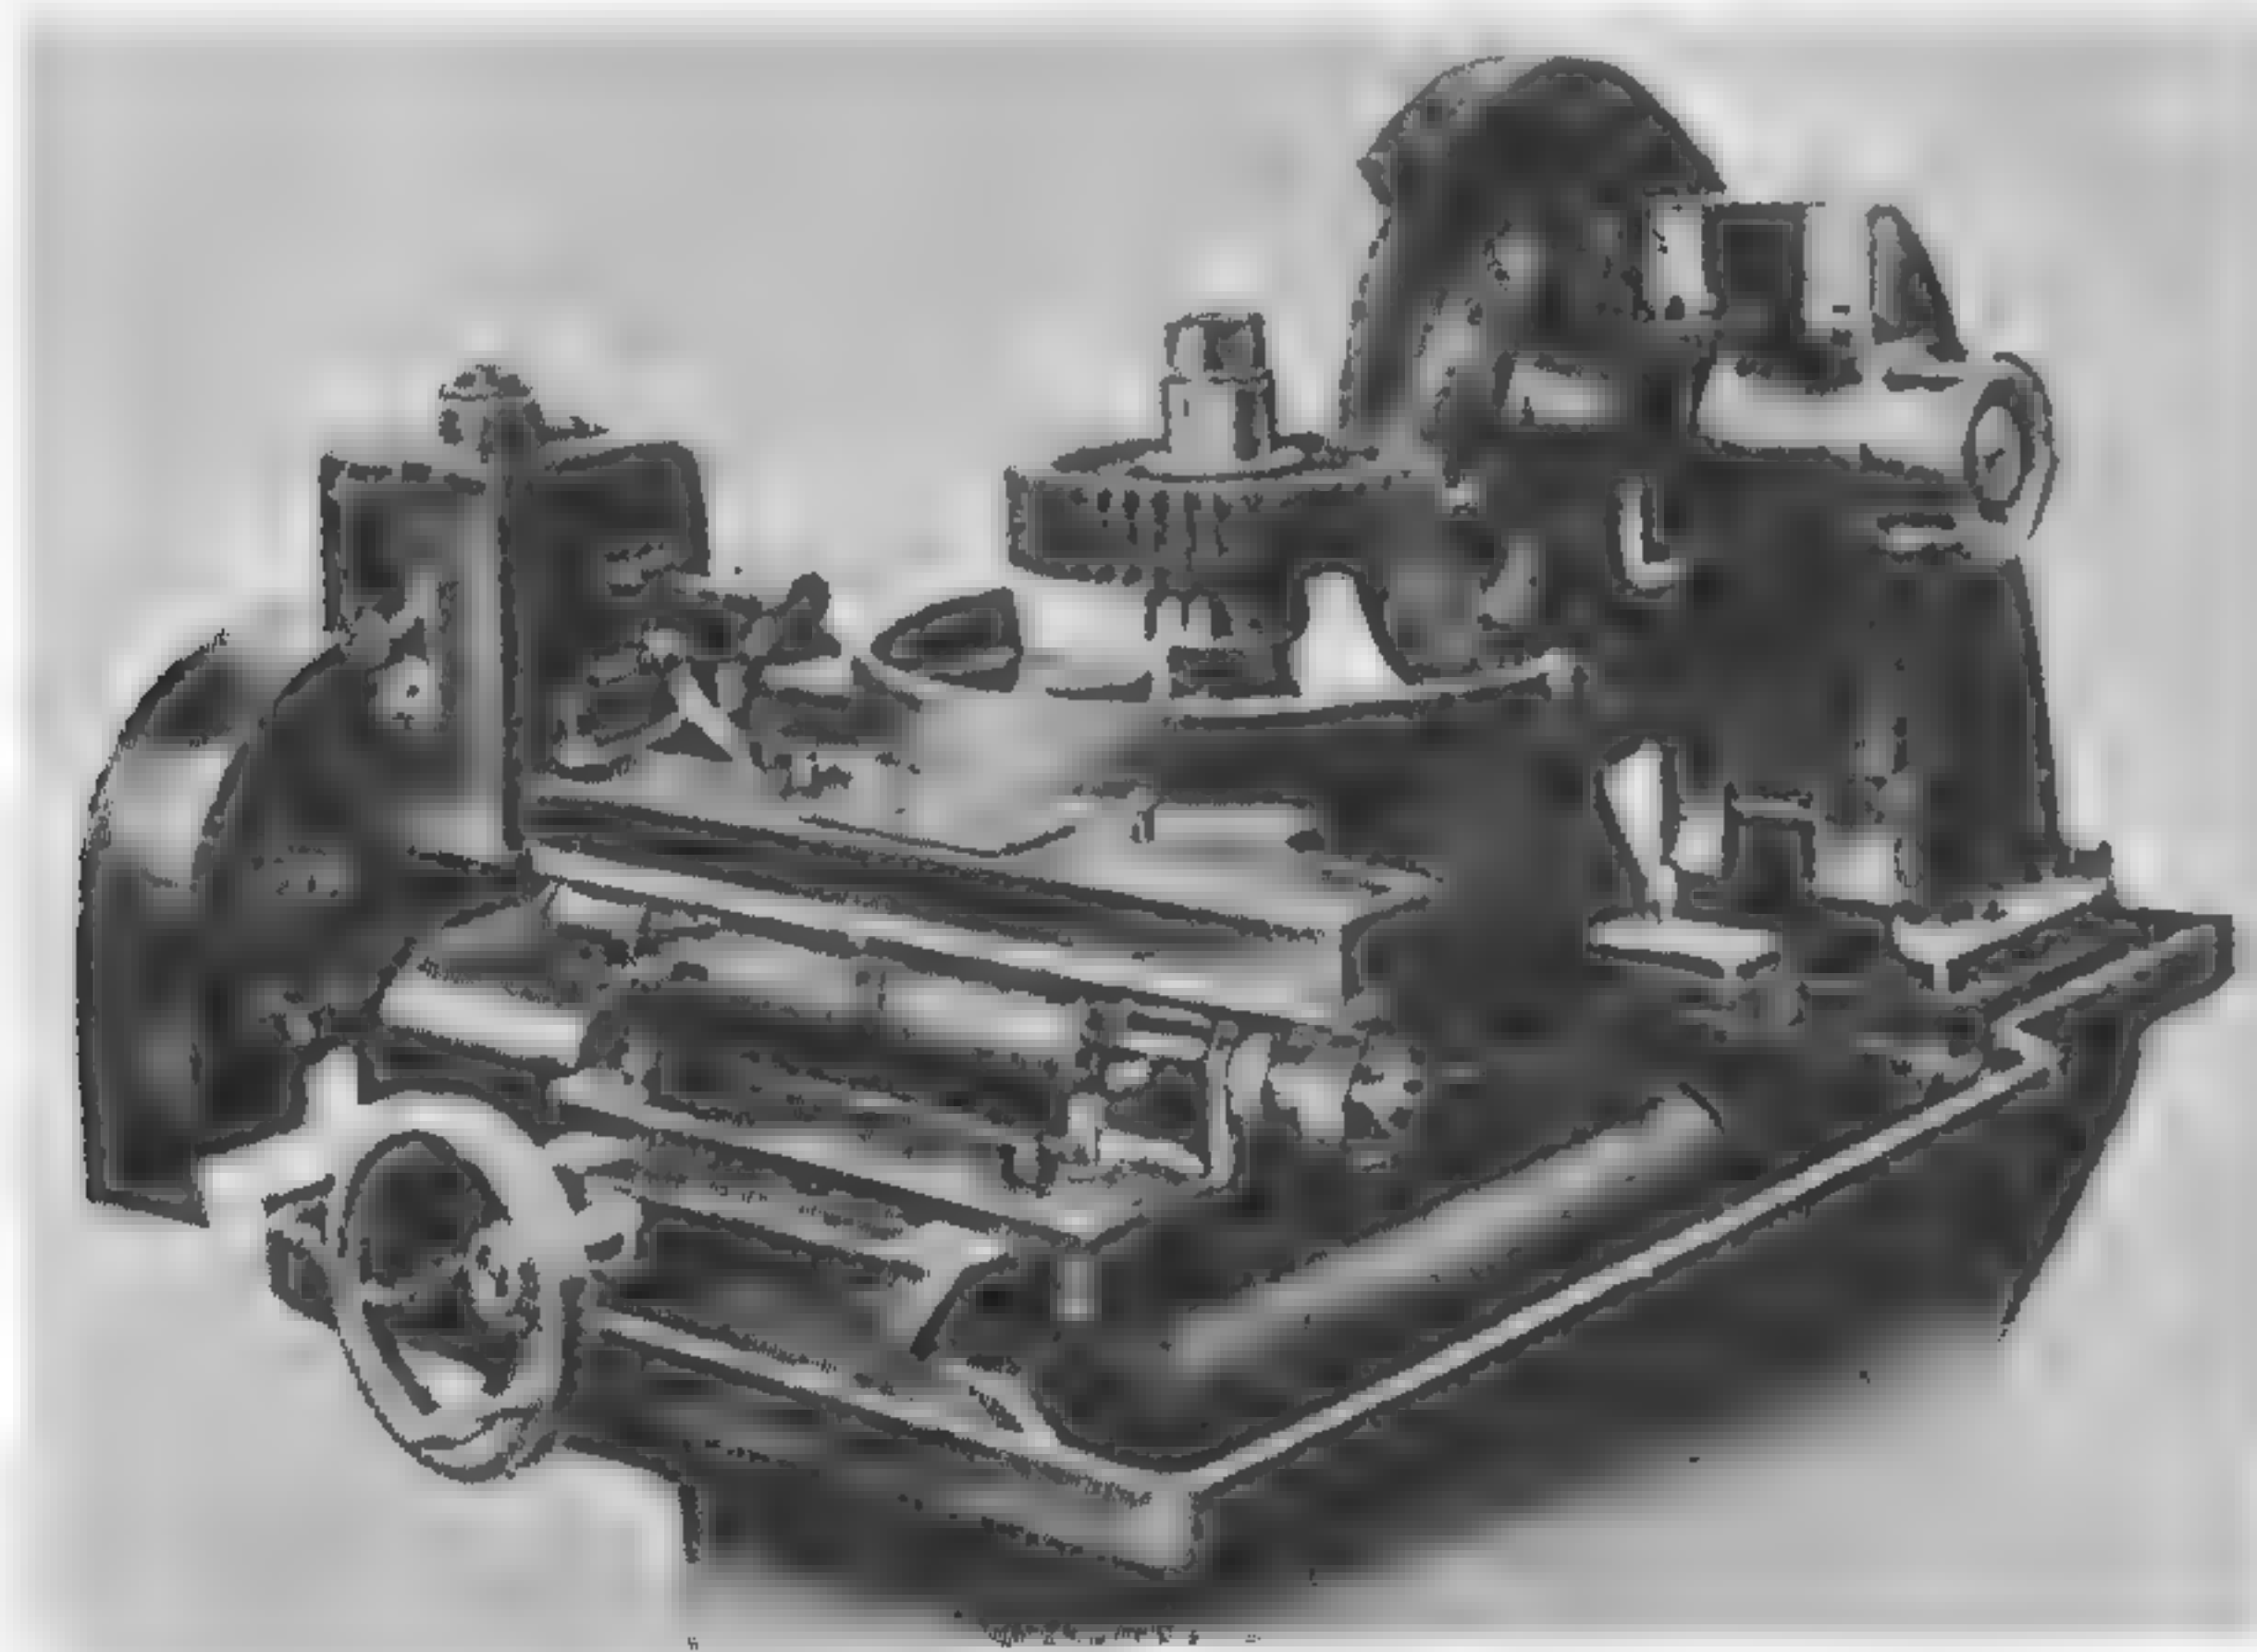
REINECKER GEAR GRINDER (Flanders)
